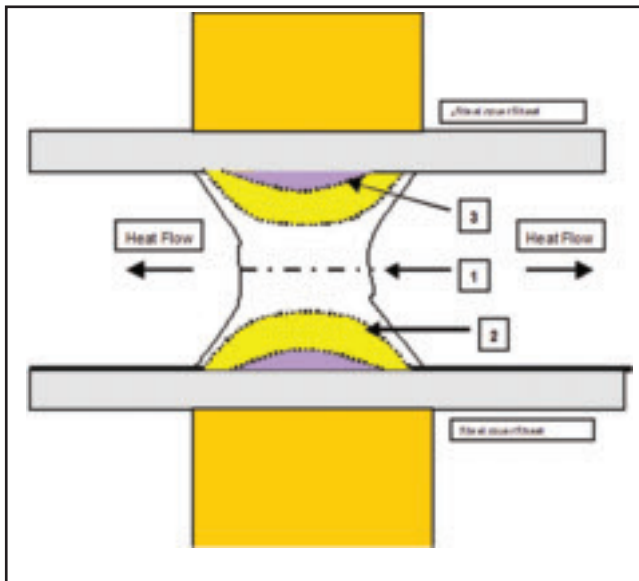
Schematic representation of the conductive heat resistance welding (CHRW) process. Note steel coversheets providing heat generation and constraint of the Al weld metal.
